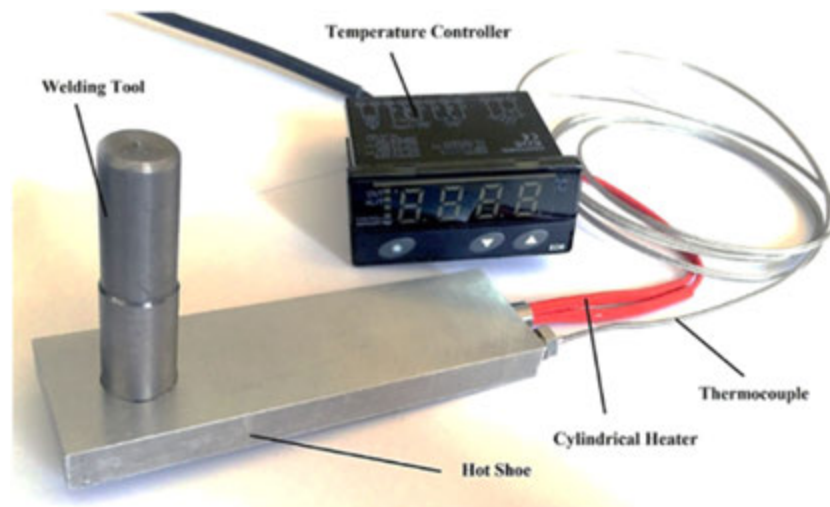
Additional heating set-up for the friction stir welding of reinforced dissimilar polymer friction stir welding. Reproduced from Rezaee Hajideh, M., Farahani, M., Molla Ramezani, N., 2018. Reinforced dissimilar friction stir weld of polypropylene to acrylonitrile butadiene styrene with copper nanopowder. *Journal of Manufacturing Processes* 32, 445–454.
